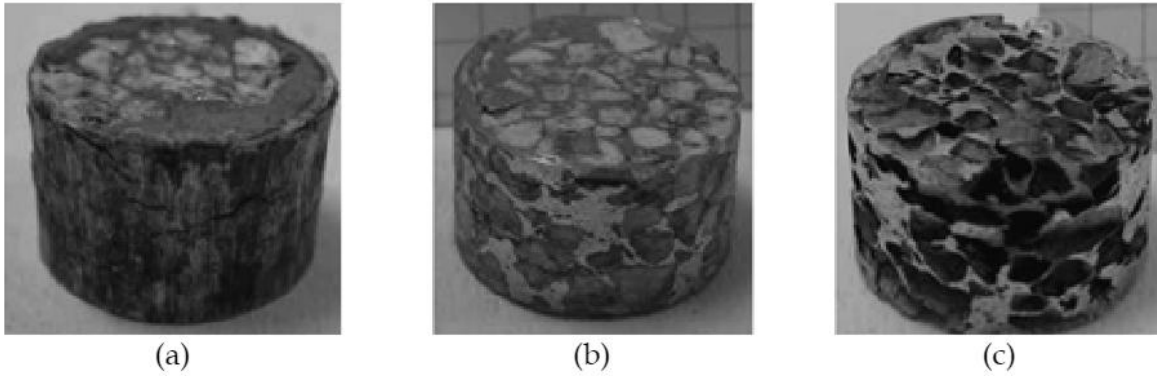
Sample after: sintering (a), machining (b), leaching (c) [26].
